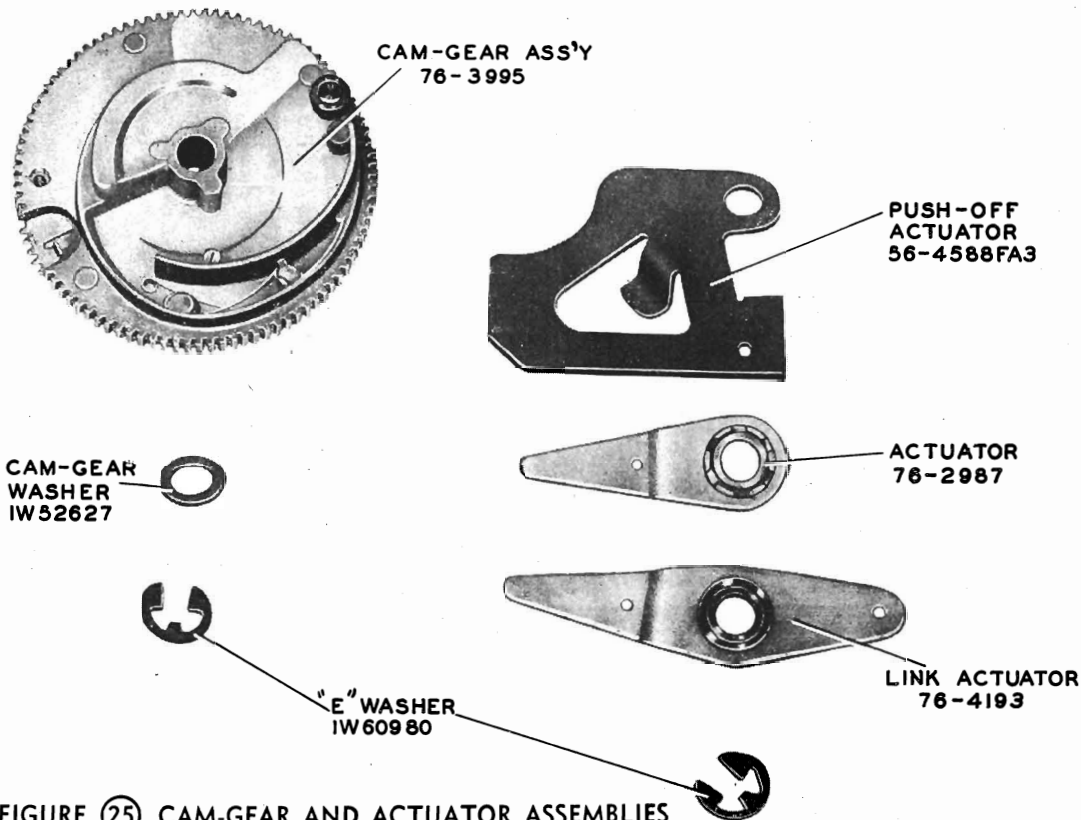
CAM-GEAR AND ACTUATOR ASSEMBLIES
